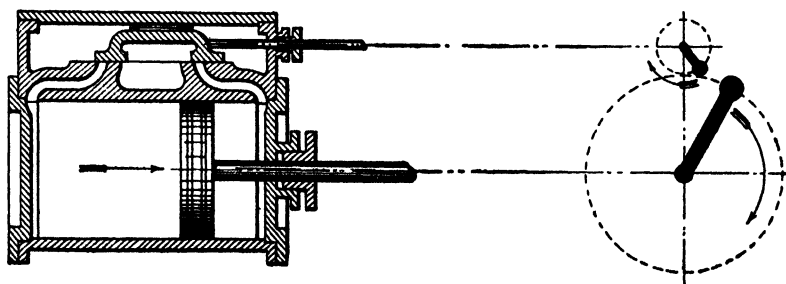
Valve Position with Exhaust Port Closed on Crank End
